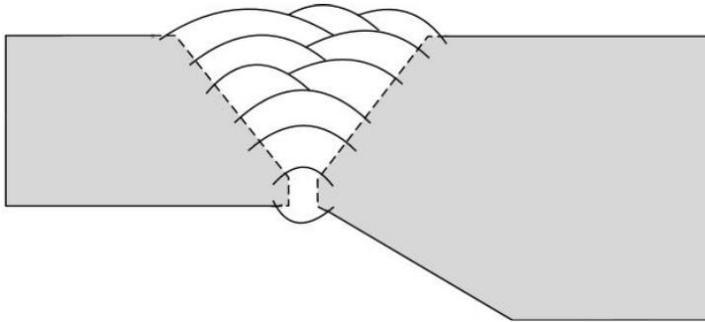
Schematic Showing Transition Weld with Taper at Pipe End
